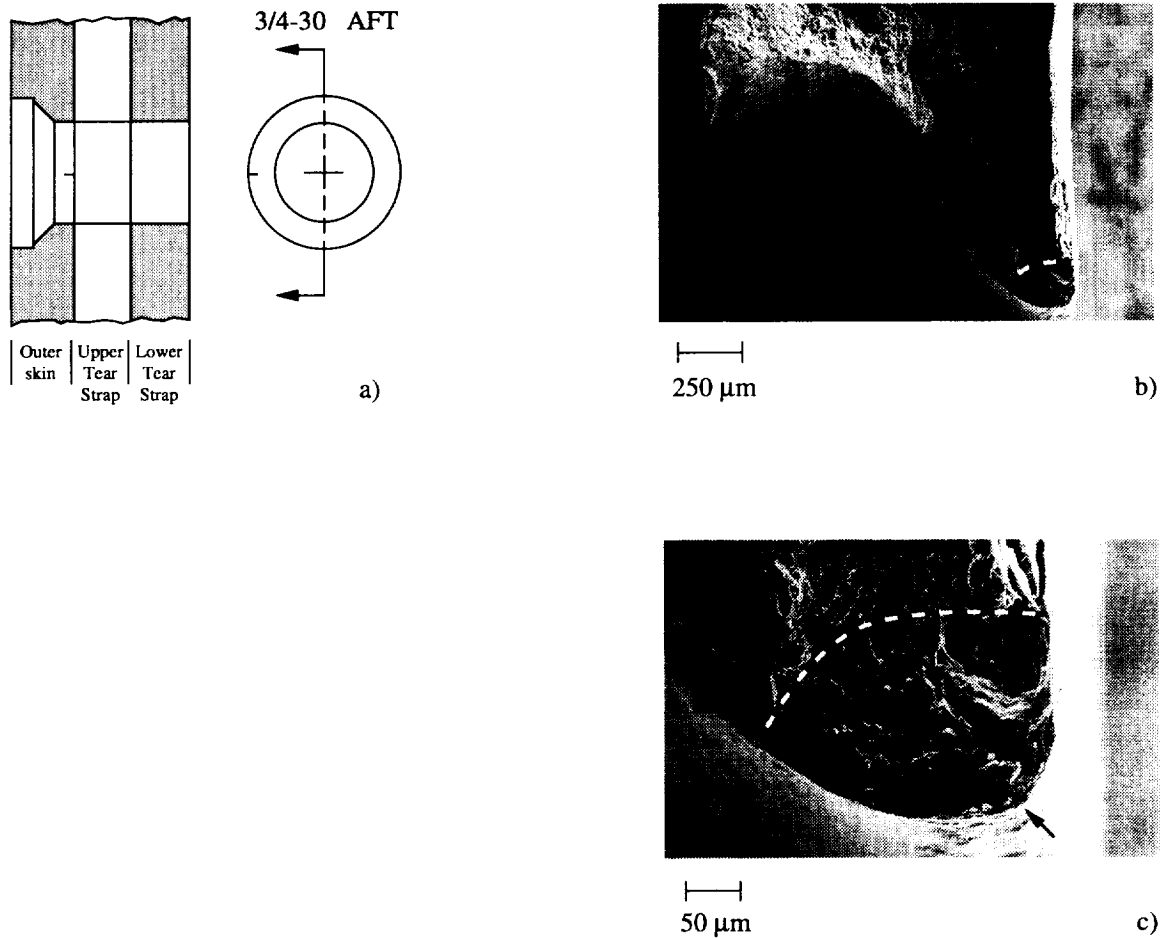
a) The schematic shows the rivet hole 3/4-30 configuration and the location of the outer skin fatigue crack oriented in the aft direction and about the 9 o'clock position. b) The SEM micrograph shows the fracture surface of the fatigue crack located at the shank region of the outer skin rivet hole. The dashed line marks the fatigue crack front. c) The SEM micrograph shows the fatigue crack at higher magnification. The arrow marks the likely site of crack initiation and the dashed line marks the fatigue crack front.
